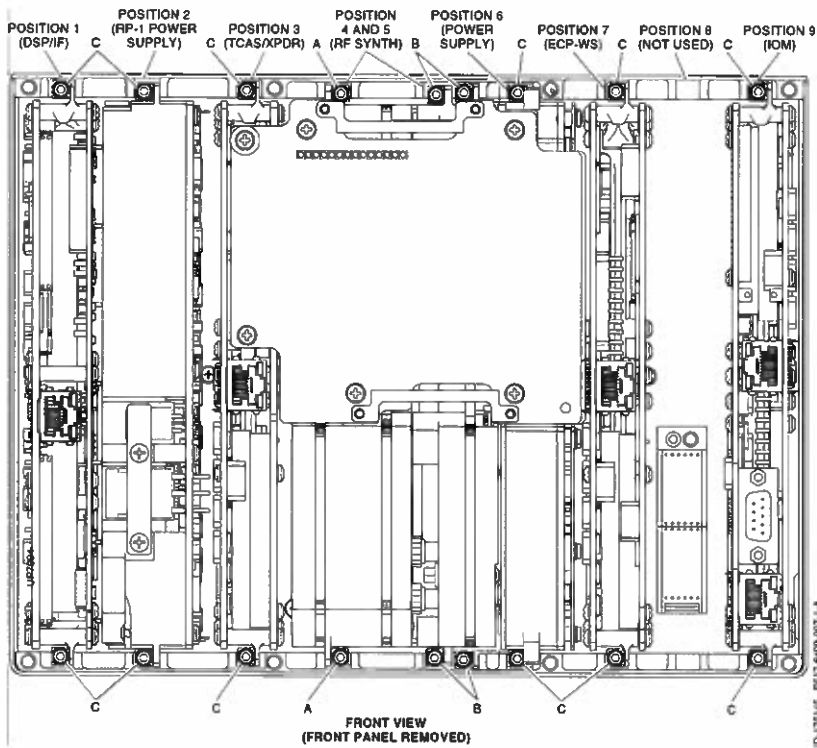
(Sheet 1 of 3) AESU Configuration Assembly Detail Drawing
